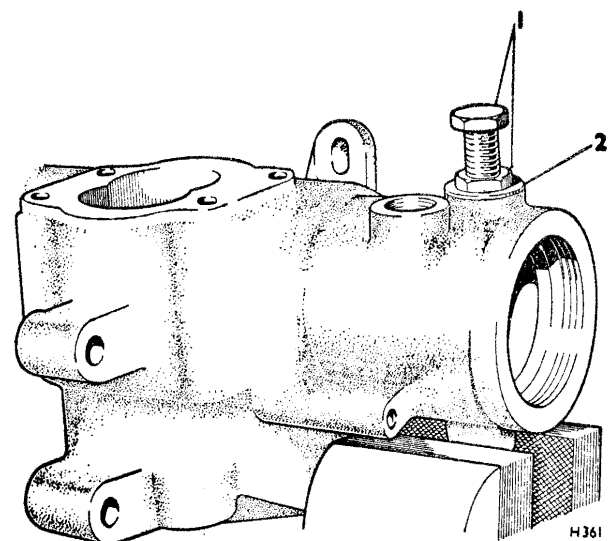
REMOVING HOSE CONNECTOR SEAT WITH BOLT
